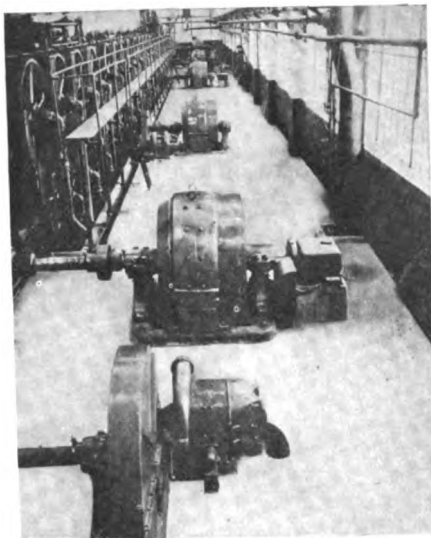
REGULATOR TYPE OF SECTIONAL DRIVE
